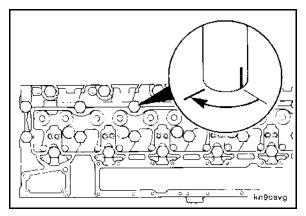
TURN THE SOCKET UNTIL THE SOCKET MARK ALIGNS WITH THE CYLINDER HEAD MARK
